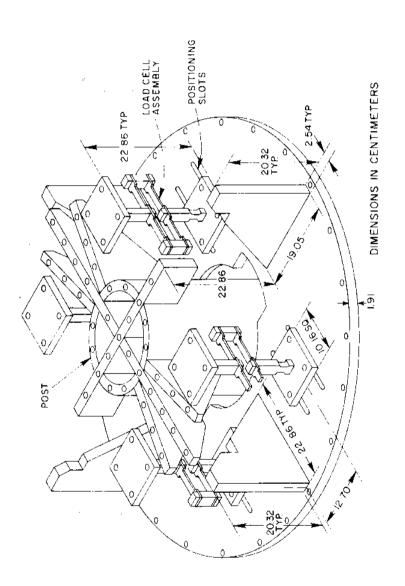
FOUNDATION LOAD CELL ARRANGEMENT
